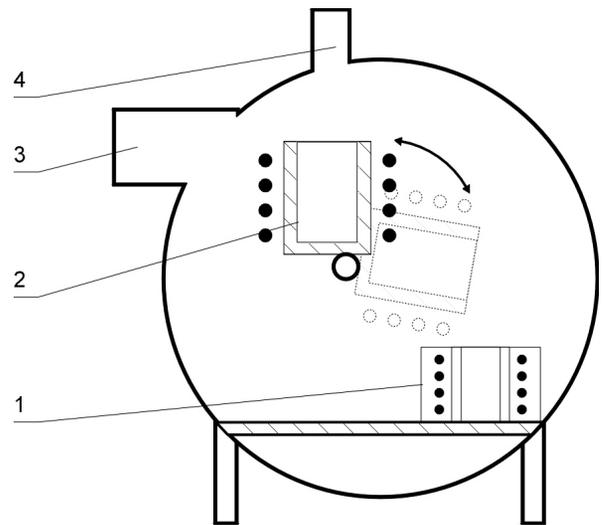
The scheme of experimental device: 1 - an ingot mould with a heating system; 2 - an inductor with a ceramic melting pot; 3 - an outlet to vacuum pumps; 4 - a mounting point for the system for temperature measurements and sample collection
